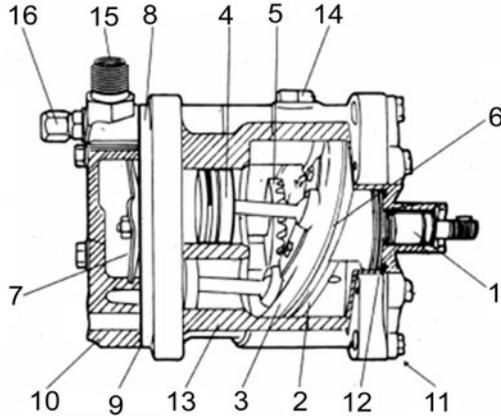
Axial rotating compressor with fixed displacement (wobble type). Components: 1 shaft, 2 cam rotor, 3 rods control flange, 4 piston, 5 drive gear, 6 needle roller bearing, 7 combined suction/exhaust valve, 8 valves plate, 9 head cylinders seal, 10 head cylinders, 11 front cover with drive hub, 12 O-Ring seal gasket with square section for the tight between cover and body, 13 compressor body, 14 intake/exhaust cap, 15 nipples, 16 service valve.
